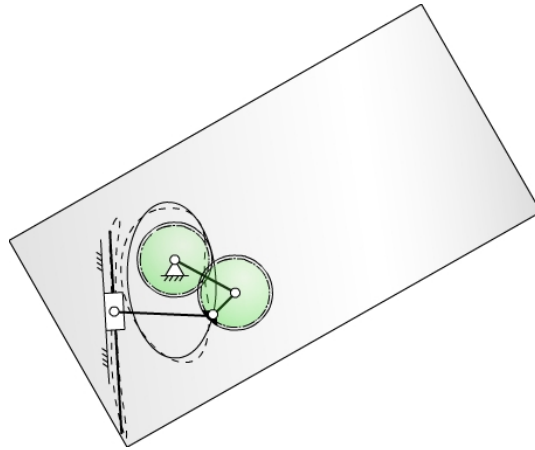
This mechanism is combined by a slider and a geared 2R.
